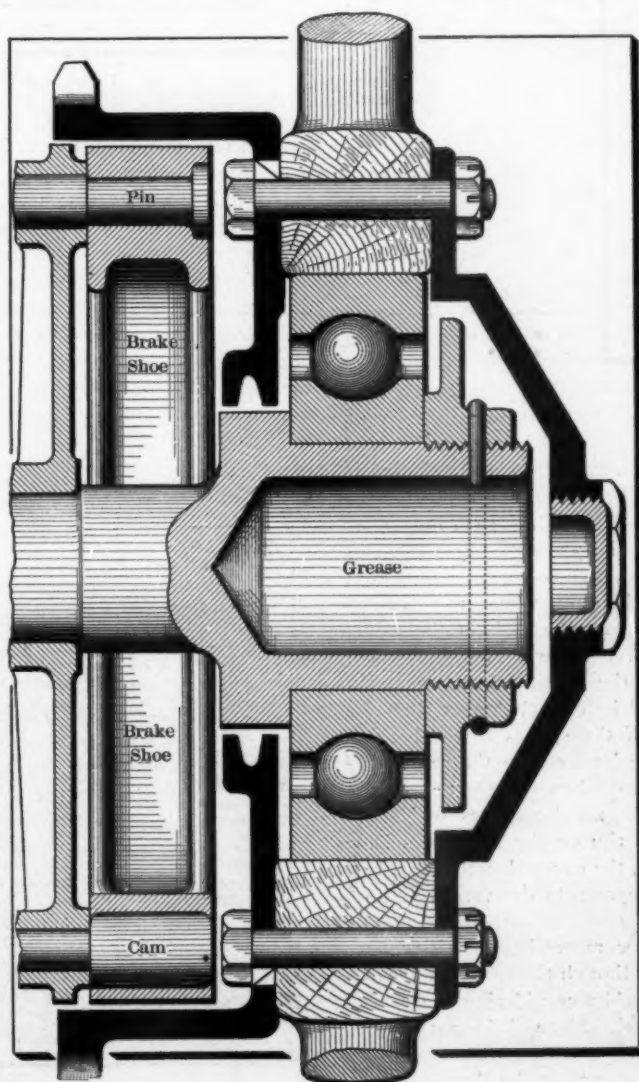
Section through rear wheel with combination brake drum and inner flange
